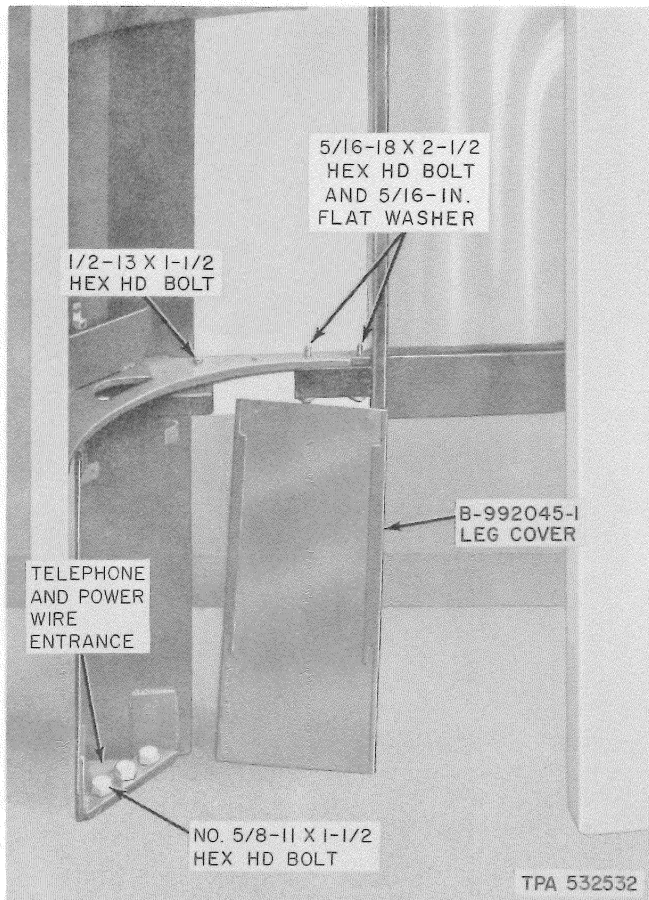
Assembly of Kiosk, Leg, and Bottom Panel Support
